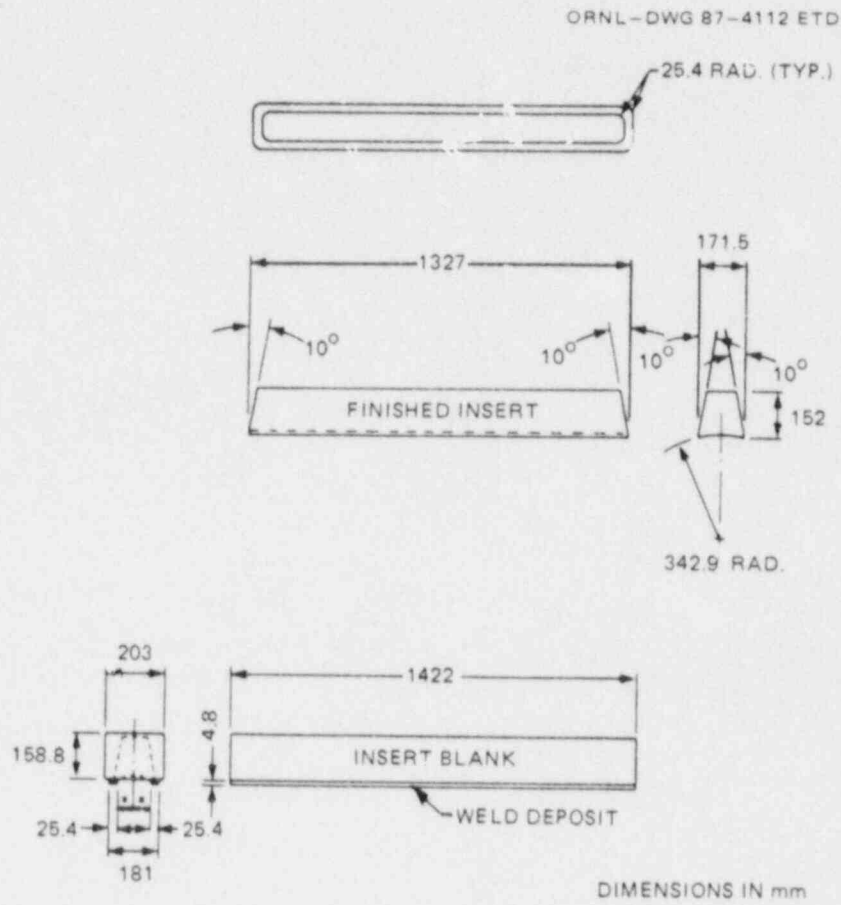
Insert with weld buildup on vessel ID surface.
